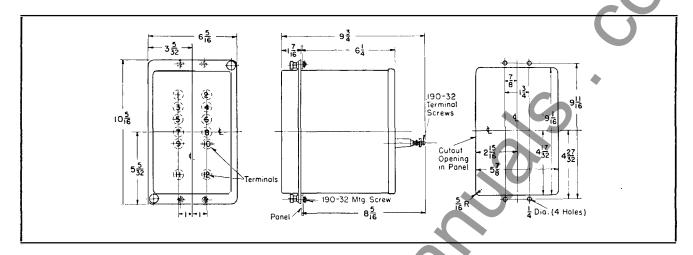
Types CB-F, CB-2F, CB-7F, CB-8F Flush Mounting.
